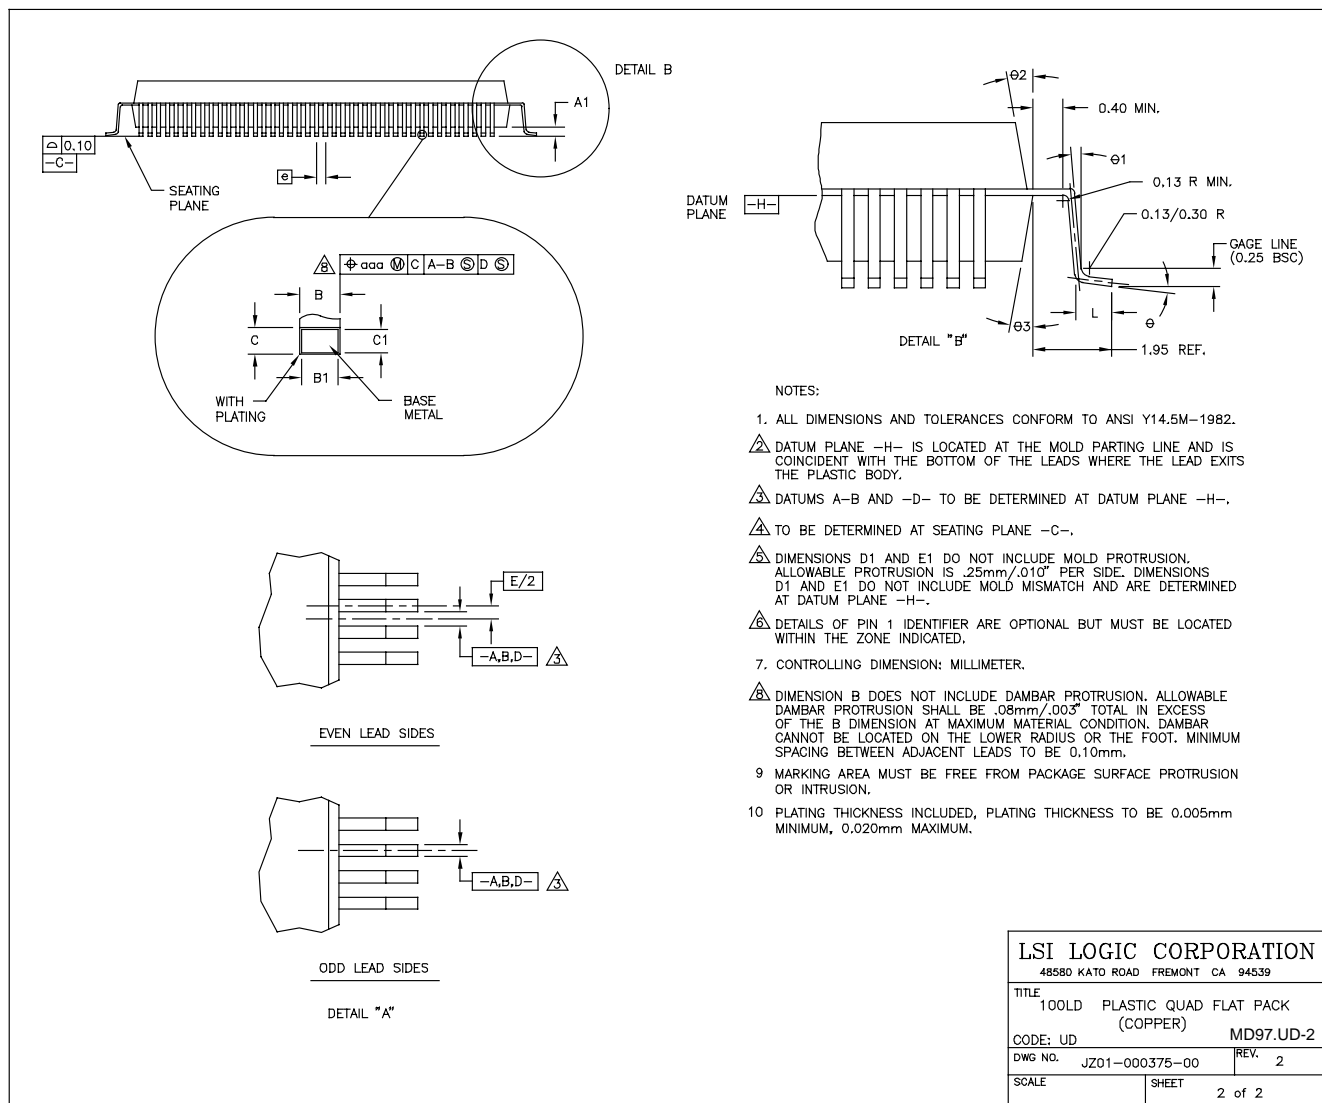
and Figure 20 show the mechanical drawings for the 100-pin PQFP L64734 package.
